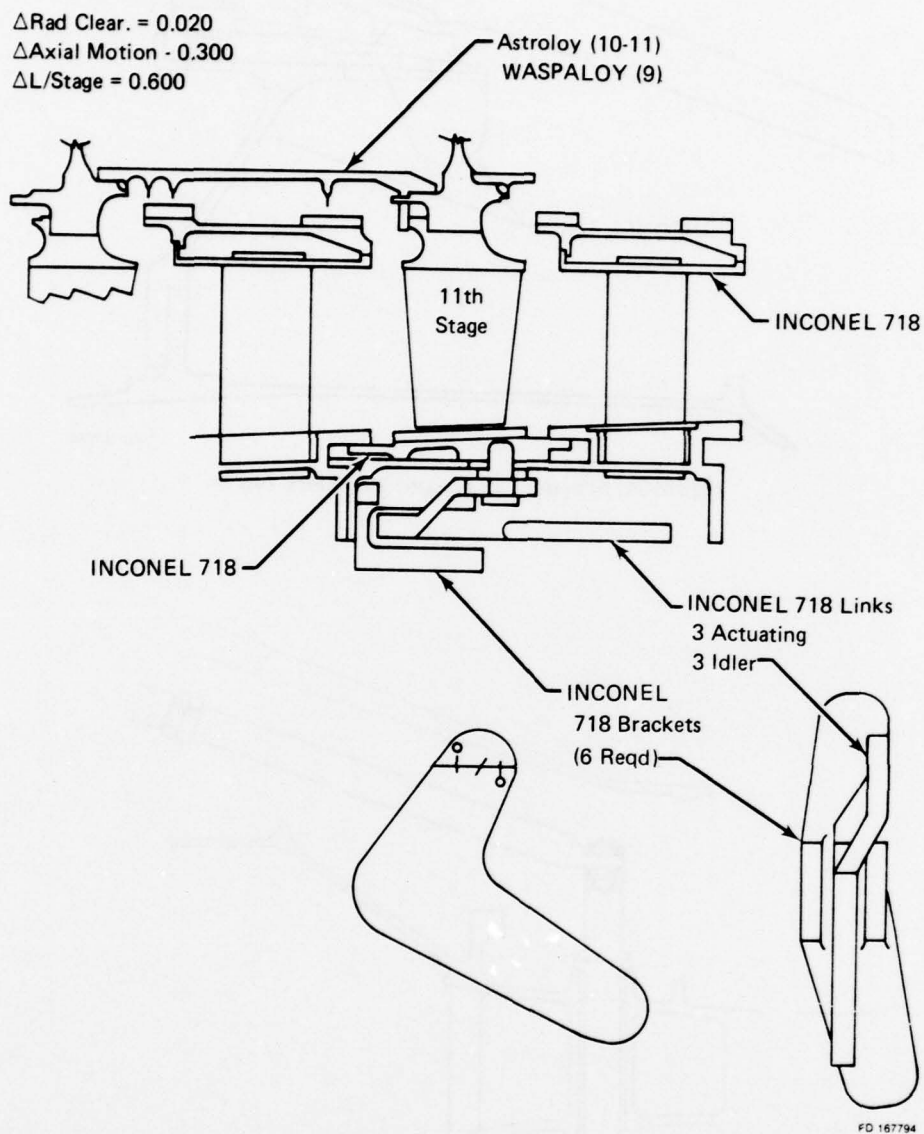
Scheme No. 6A, Rear Compressor Stages 9 through 11, Sketch No. 8
